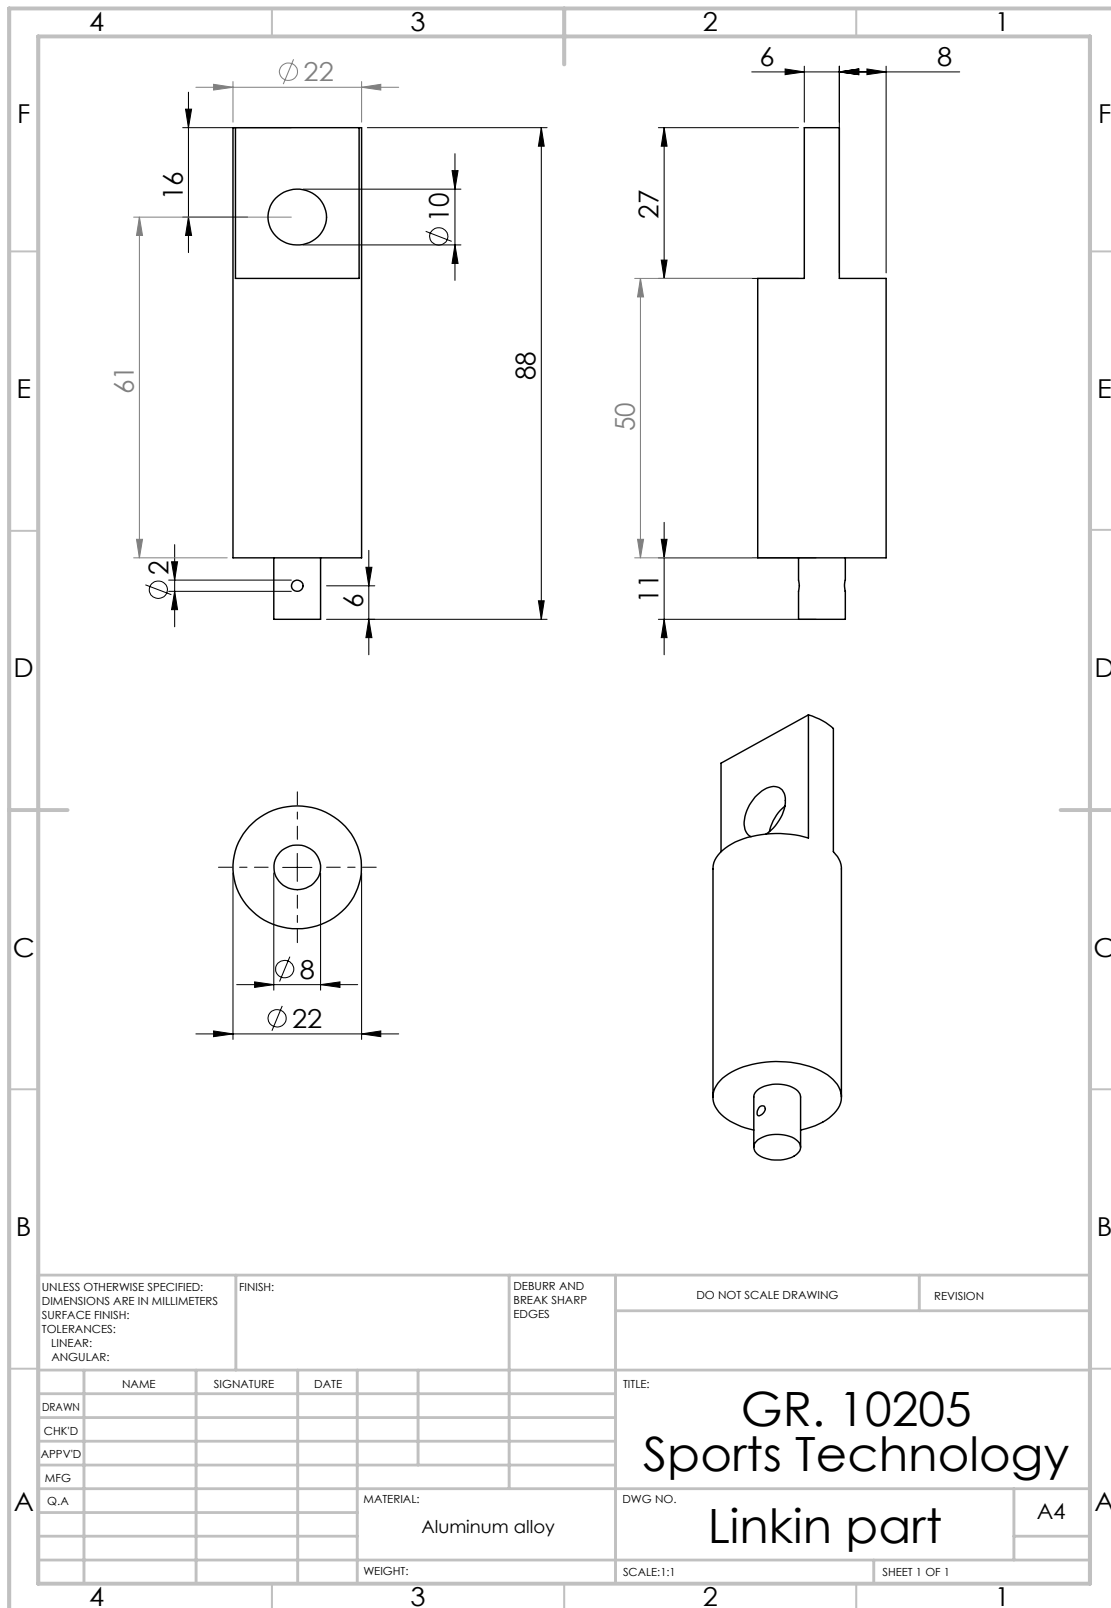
The technical drawing of the linking part. The dimensions given are in mm and degrees.
